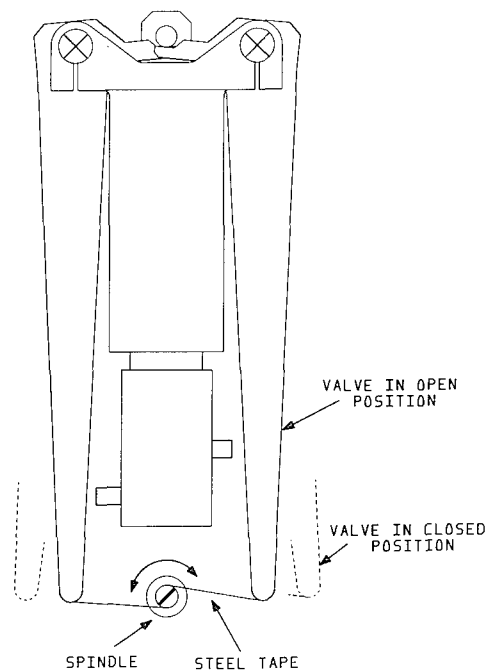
Spindle and Steel-Tape Drive for Lift-Arm Actuation
